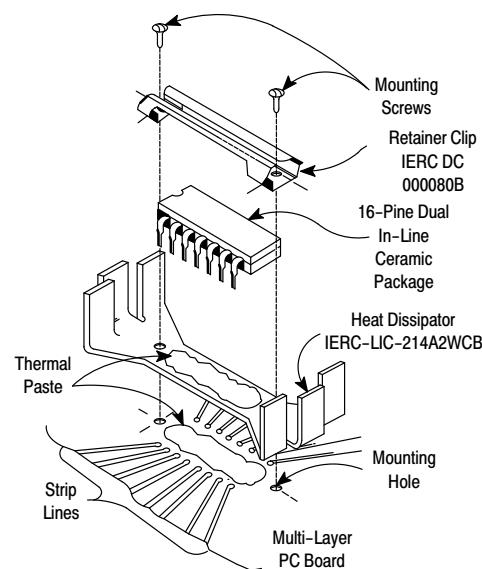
MECL High-Power Dual-in-Line Package Mounting Method
